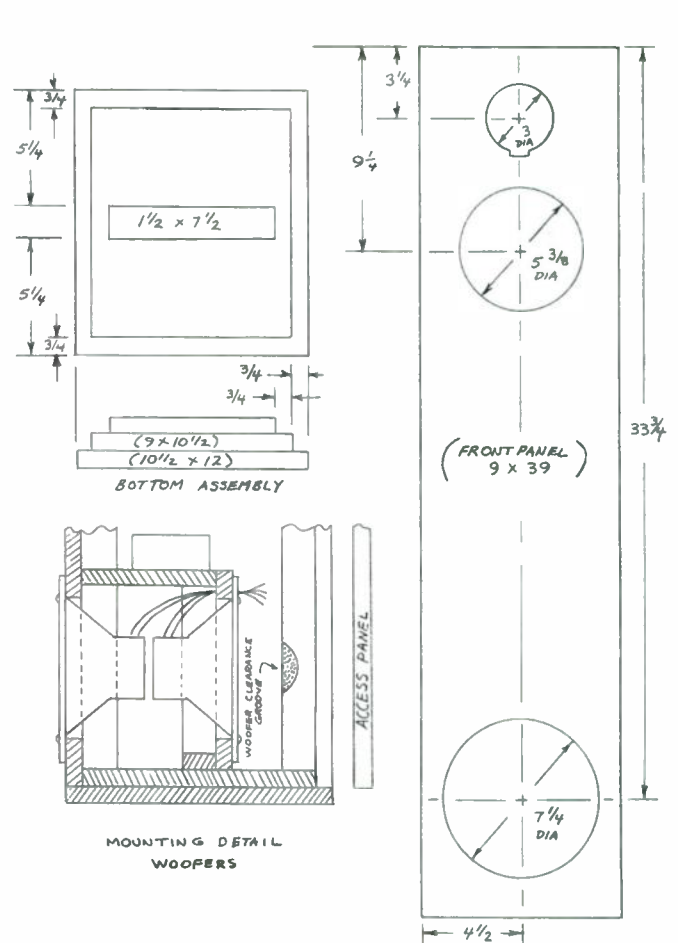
Front-panel layout, bottom assembly detail, and woofer-mounting detail.
